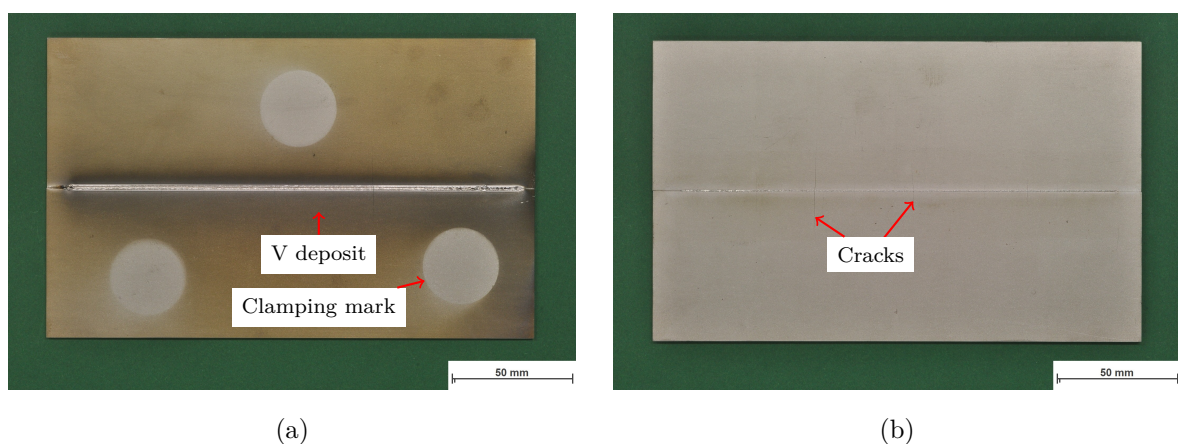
Macro photographs of a TZM sheet metal welded with V filler wire: (a) Top view and (b) bottom view
